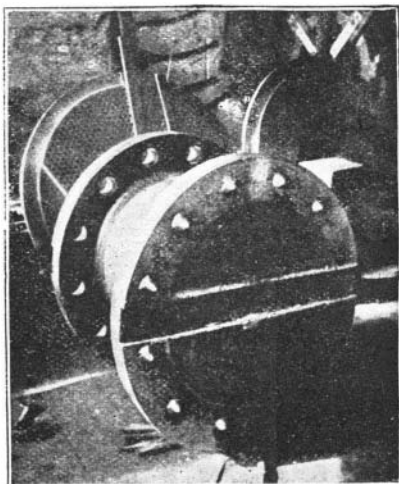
THE NEW SECTION OF SHAFT, SHOWING THE KEYWAY AND BOLT HOLES.
